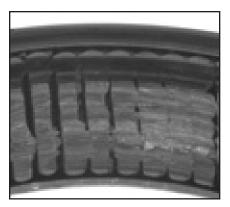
When the bearing was installed using a pusher without a ball detent to align the rollers, the rollers locked in place as the cup shrunk during installation. The shaft then spun against the locked rollers.
